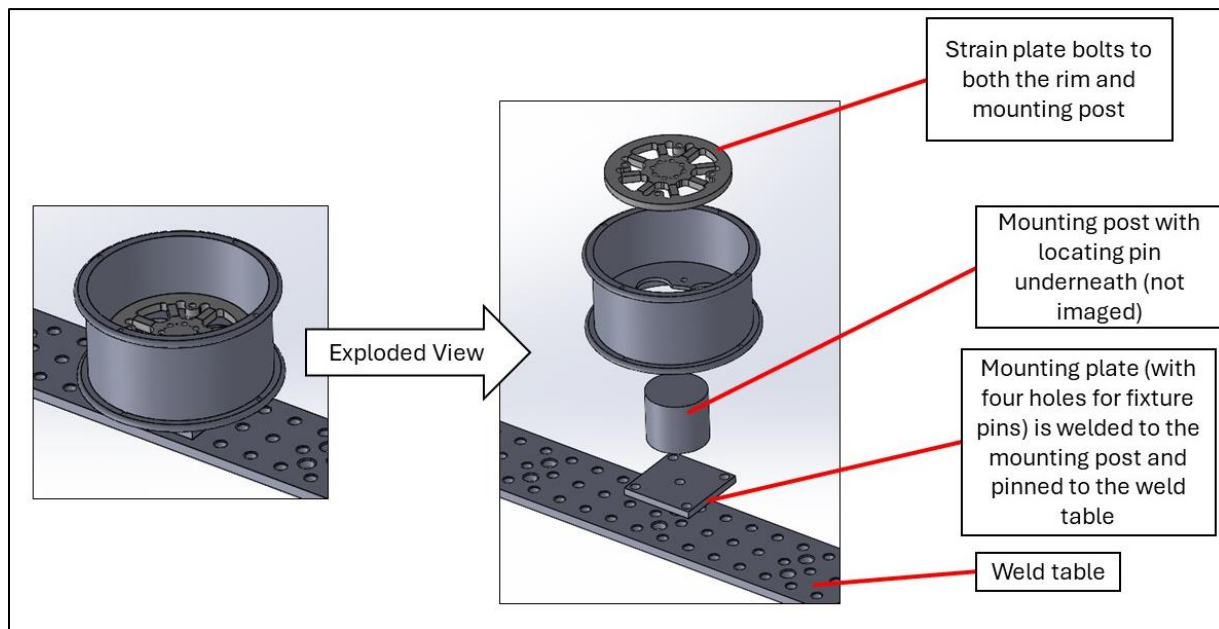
Early design concept of how to fix the WFT and rim to the weld table but allow for quick mounting and removal via fixture pins.
